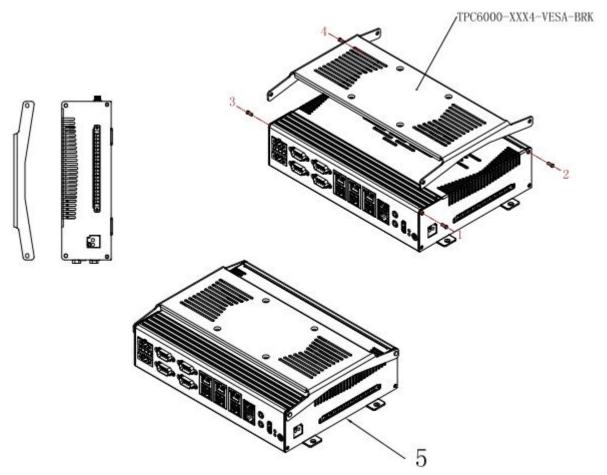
3 TPC6000-Cxx4 VESA installation
